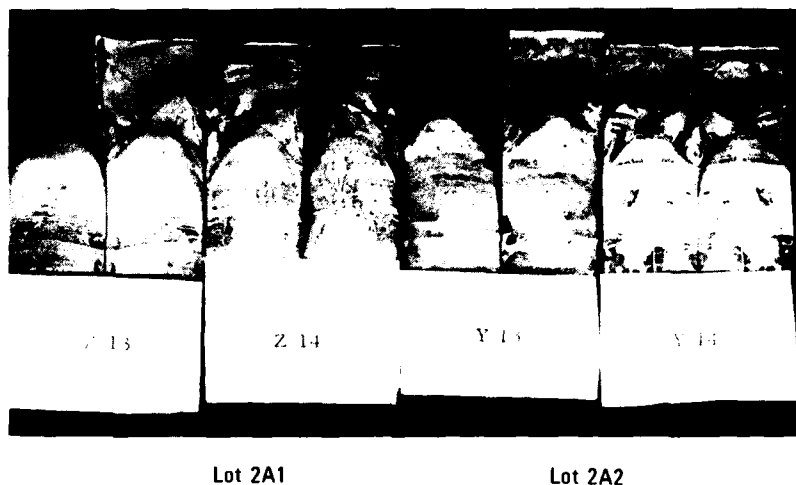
Fatigue crack growth specimen fracture surfaces, tested in 3.5 percent salt solution.
